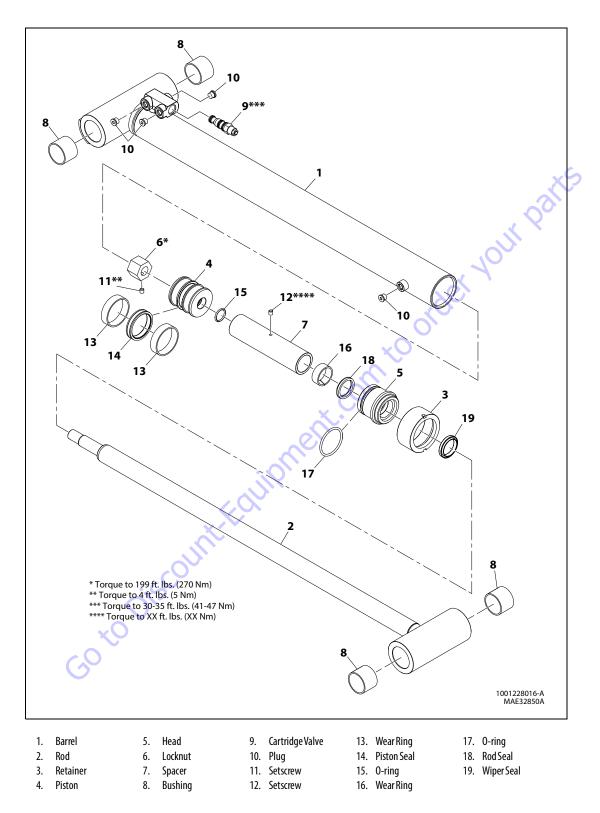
Upper Lift Cylinder - USA Built Machine
